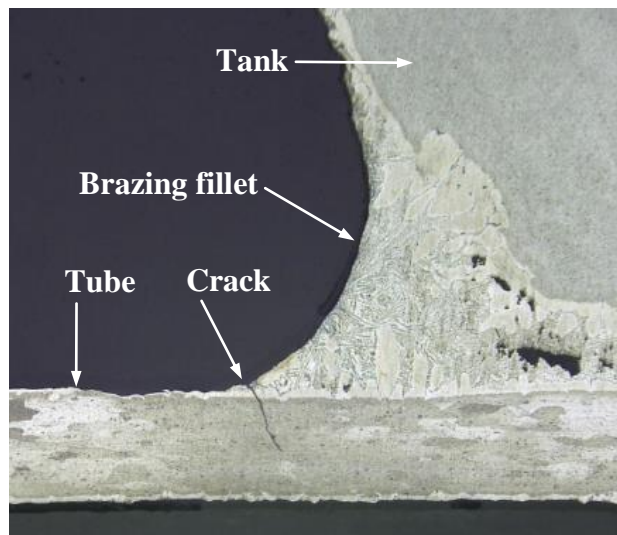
2 Cross-section at intersection of tube and tank after thermal stress test.
